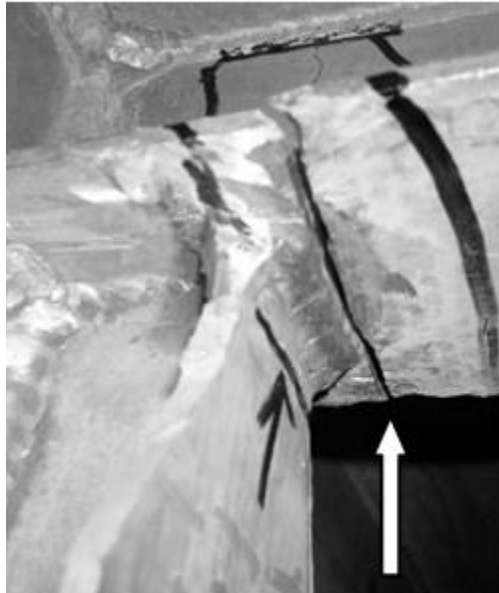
Fatigue Cracking in Al 5456-H116 Welded Joint [2]
